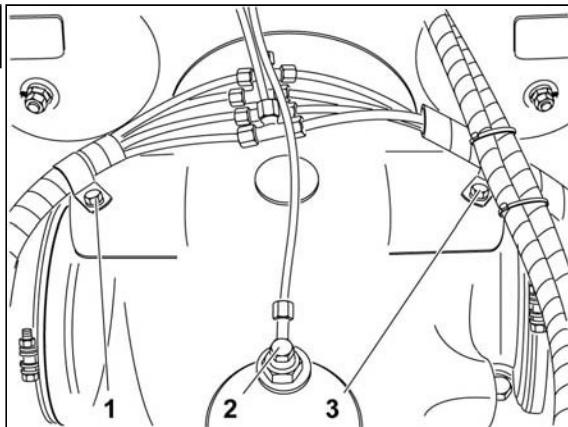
Removal of bleeding manifold and attachment of air pipes
